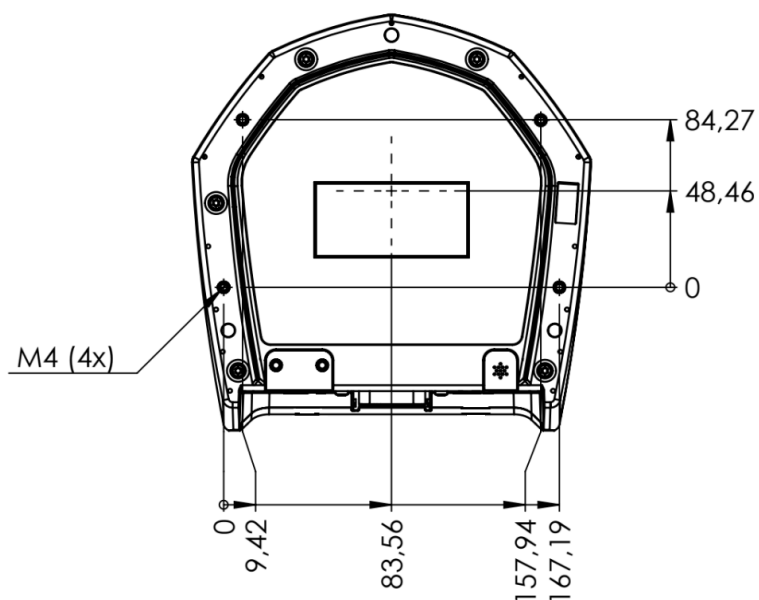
Ultra Smart Antenna Dimensions Rear View (mm)Figure 3: Ultra+ Smart Antenna Dimensions Rear View (mm)
